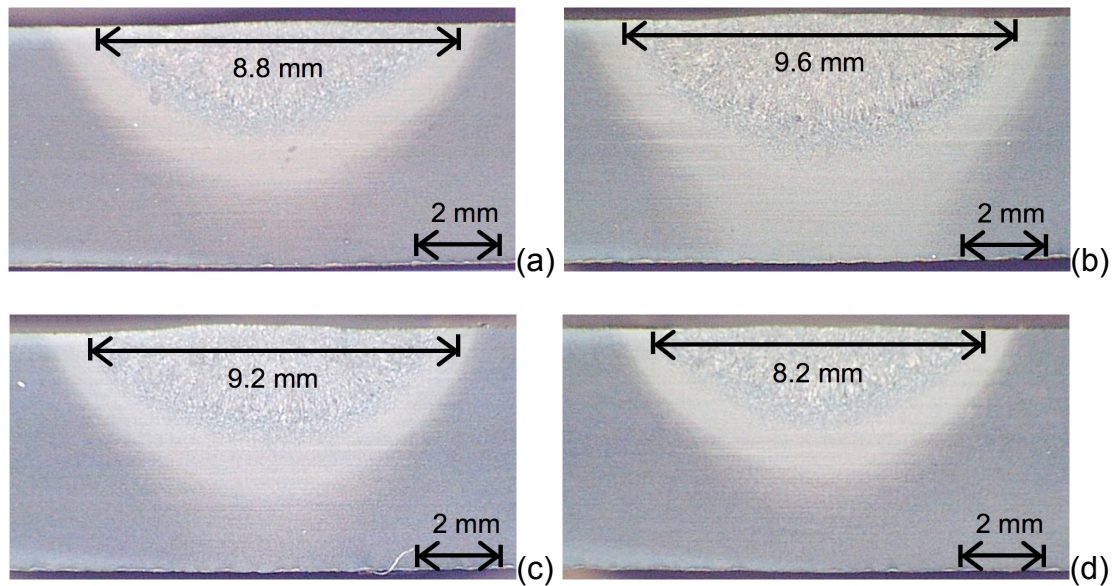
Weld macrograph for (a) Argon, (b) Helium, (c) Alternating shielding gases, and (d) GTAW-P
